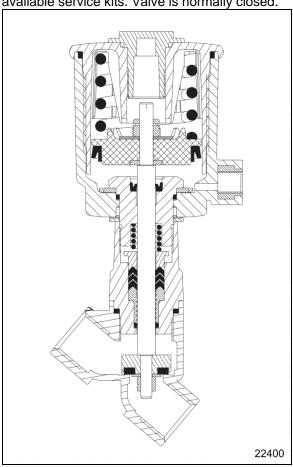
PASSENGER'S UNIT PNEUMATIC HOT WATER VALVE – TYPICAL CUT-OUT VIEW
